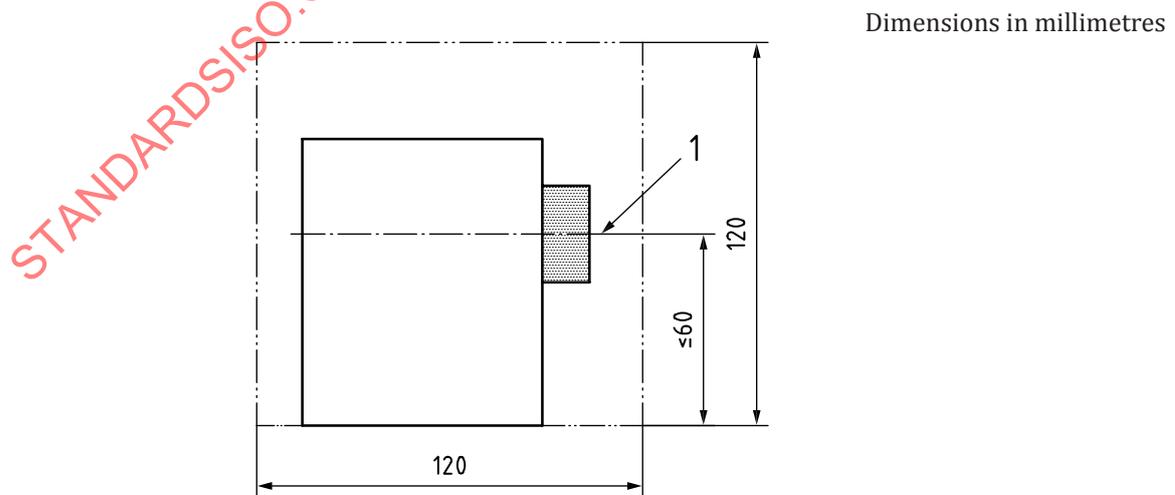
Schematic drawing of filter gauge for dimensions and orientation
